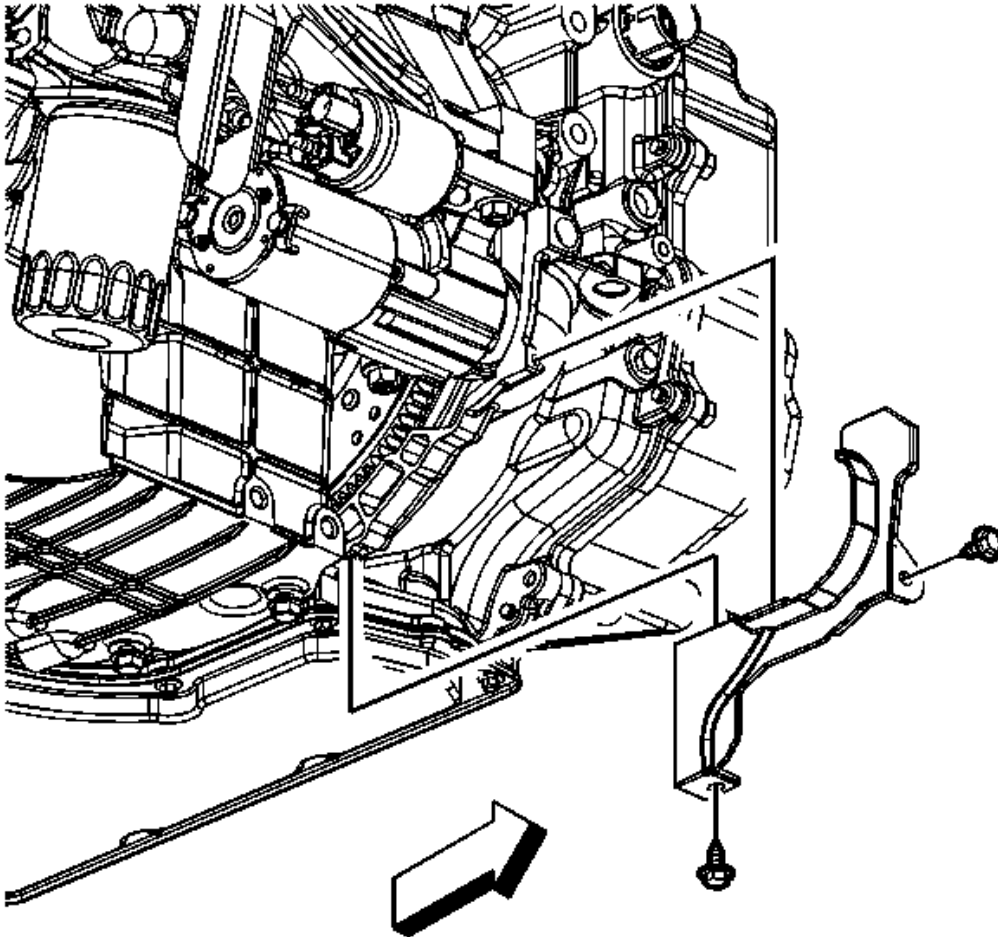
Identifying Torque Converter Cover Bolts And Cover
